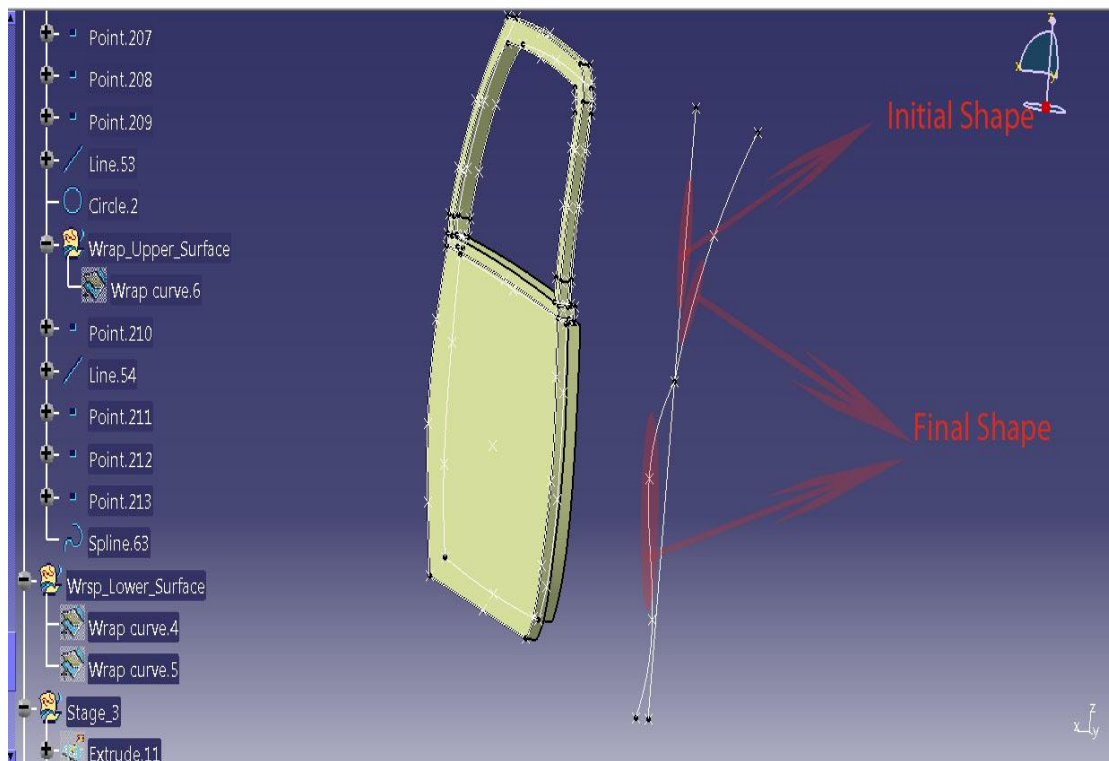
Door panel third trim set of surfaces of extrusion.
